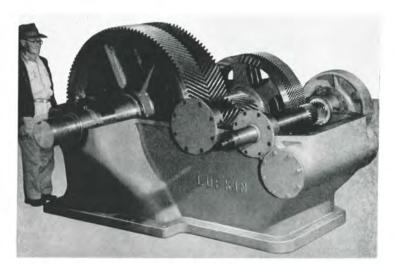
1824D Double Reduction Gear Unit, cover removed
